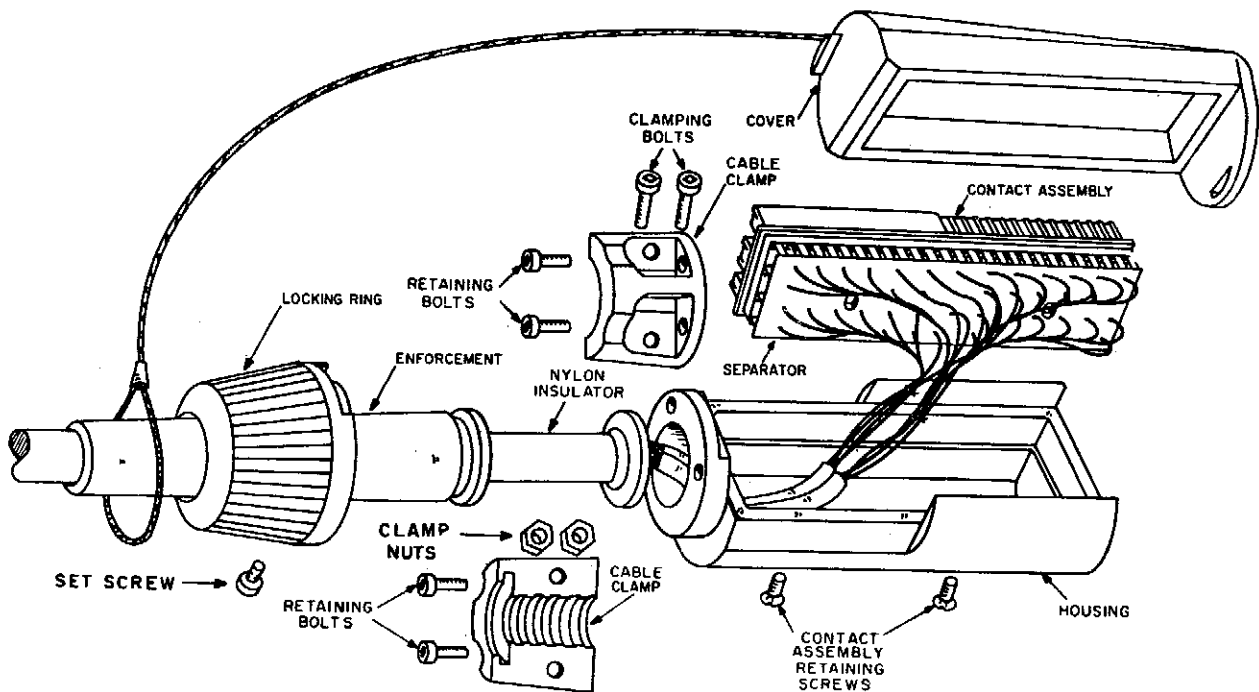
SIGNAL ENTRANCE BOX 26-pair receptacle, exploded view.
